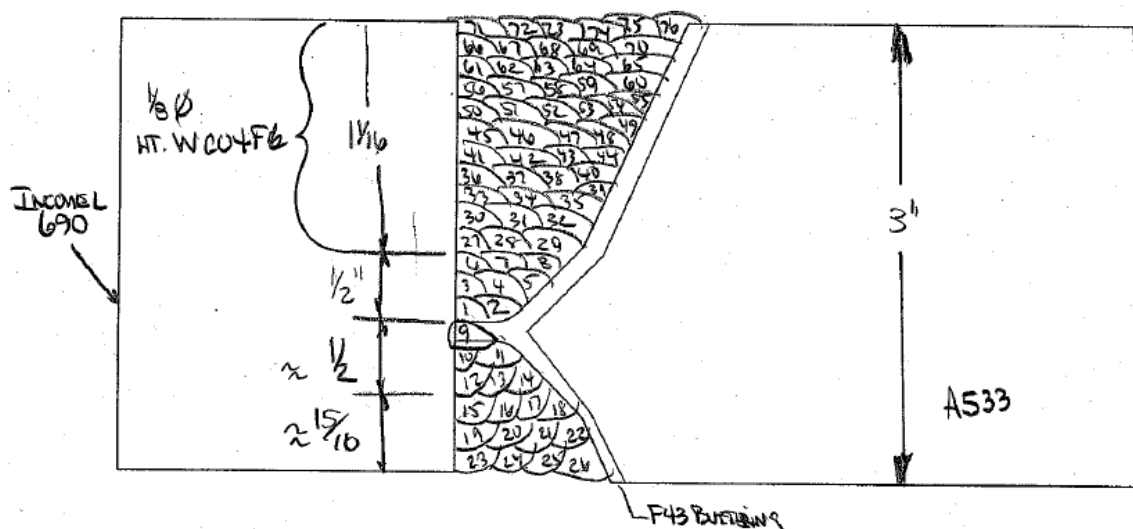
Weld buildup plan for the "new" alloy 152 weldment fabricated by ANL [7] using alloy 152 heat WC04F6. PNNL has been using the name "alloy 152 v2" for this weldment.
